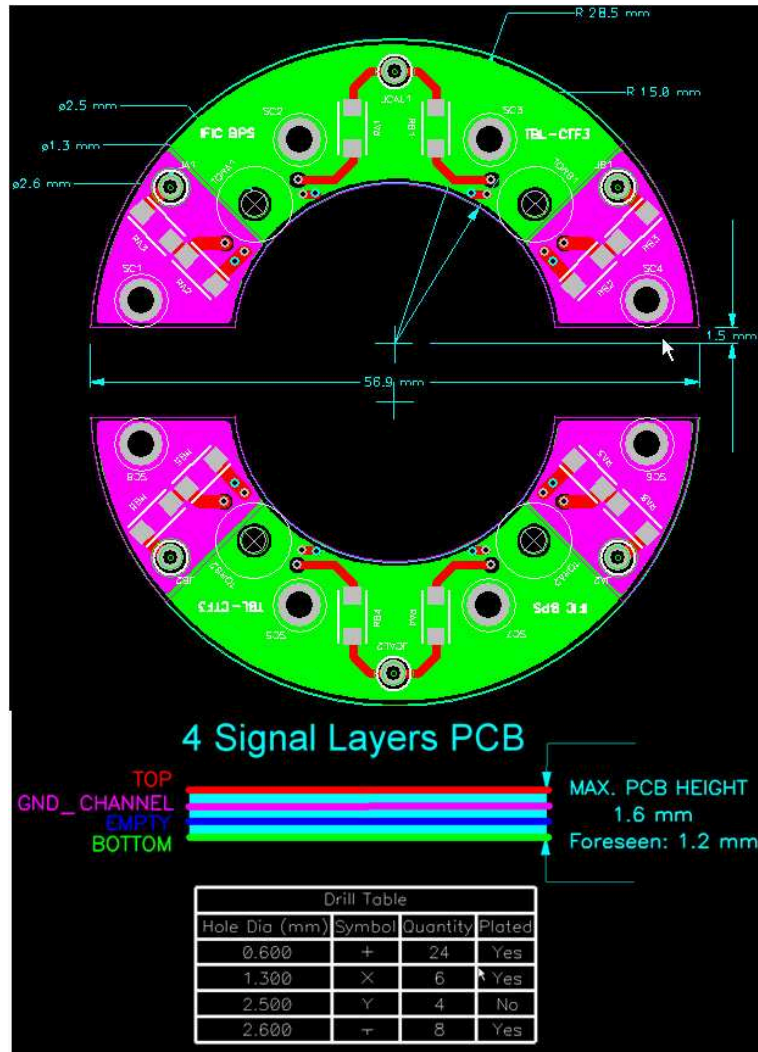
BPS PCBs layout with the dimensions, the layers structure and the drill table depicted.
